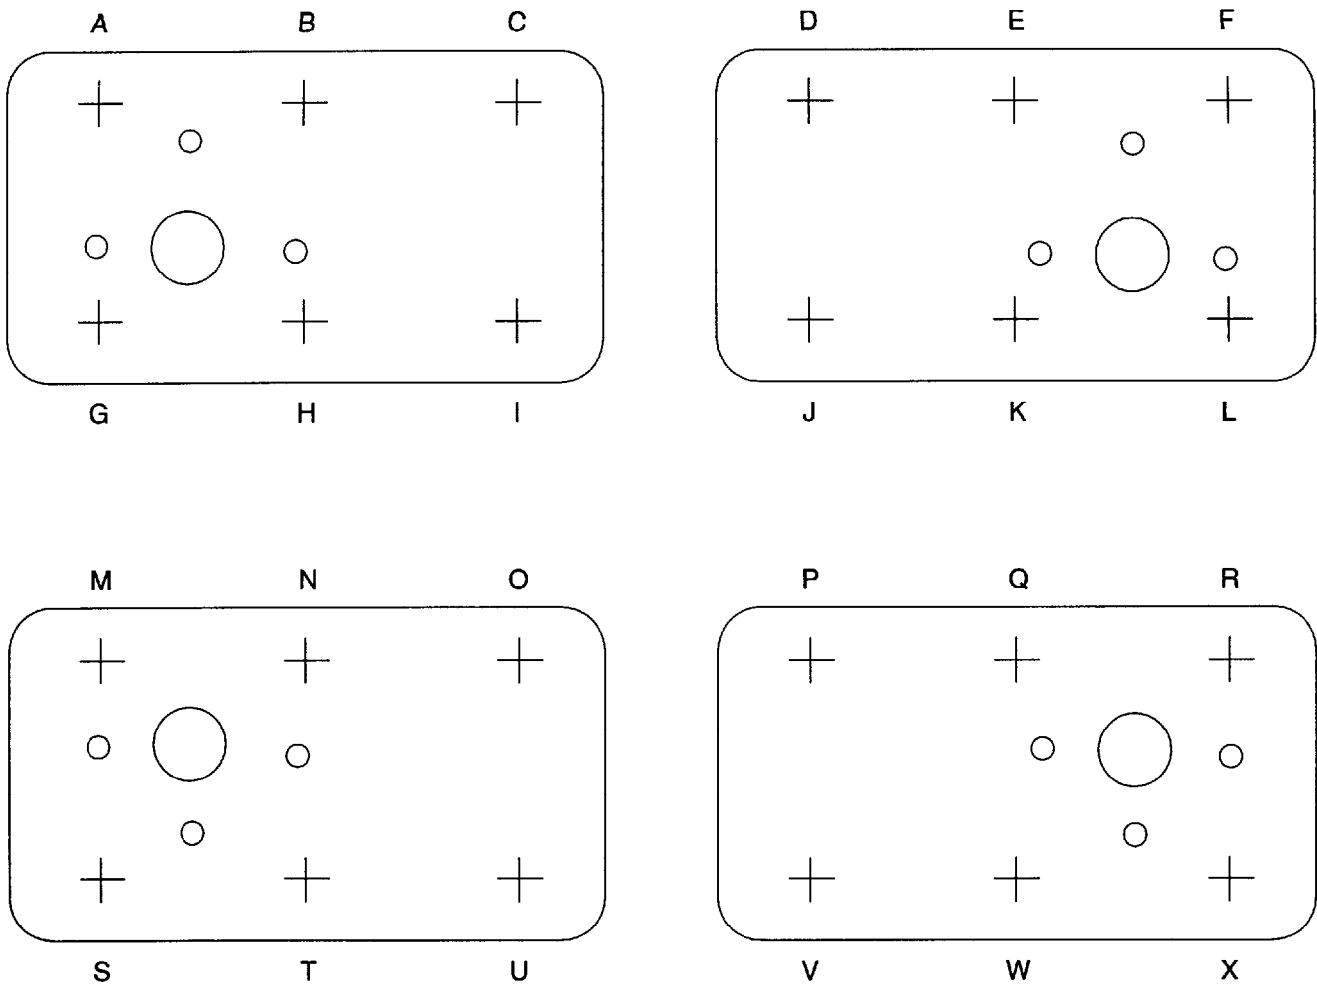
Typical Soleplate Layout for Elevation and Level Measurement
